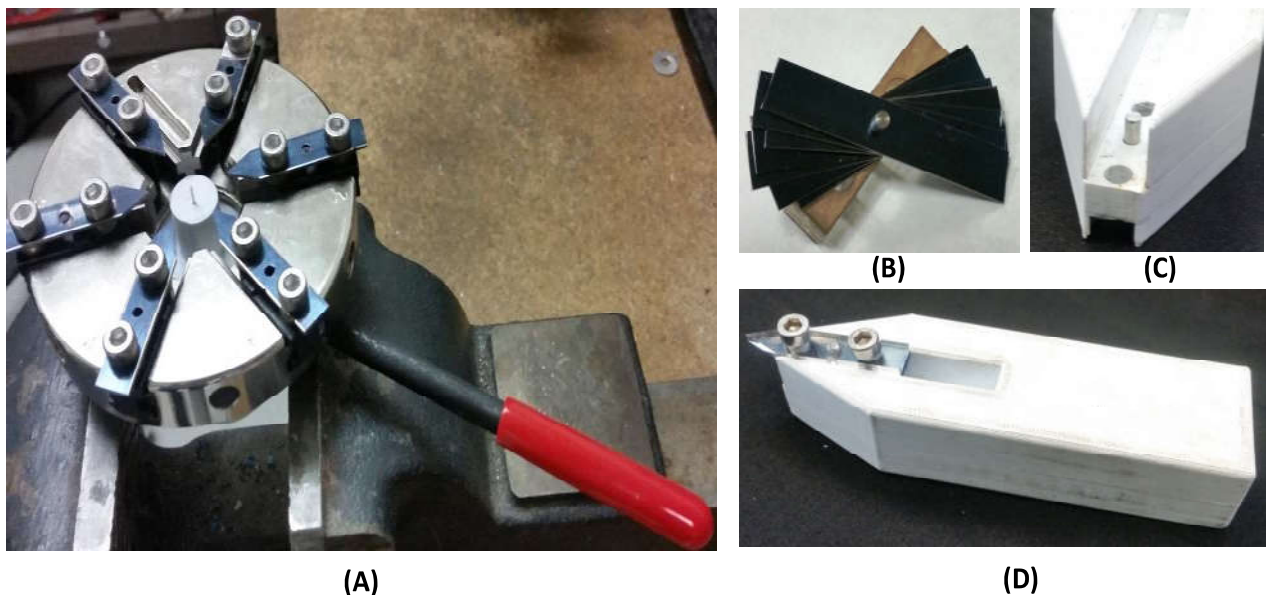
A) Designed equipment, B) laser cut Plexiglas used as a pattern for machining of plates, C) using pins for precise positioning of blades, D) made holder for machining of blades.
